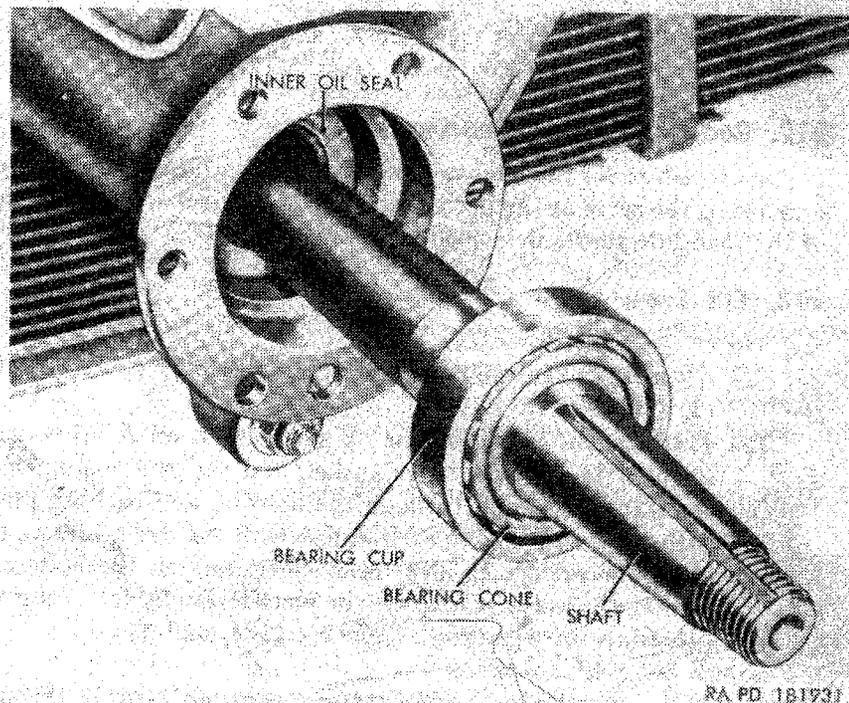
Rear axle shaft with bearing assembly—partially withdrawn from housing.
